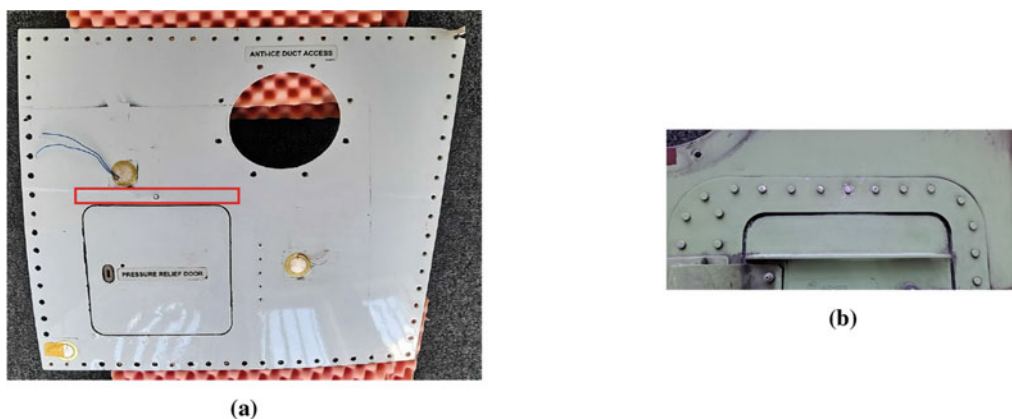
Test specimen. (a) Fuselage panel from Airbus A320 aircraft. The section of damaged rivets is highlighted in a red rectangle. (b) Section of rivets as seen from the back of the panel
